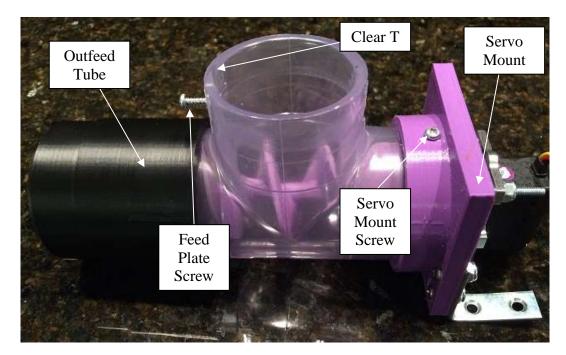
Dispenser without Candy Container / Feed Plate
